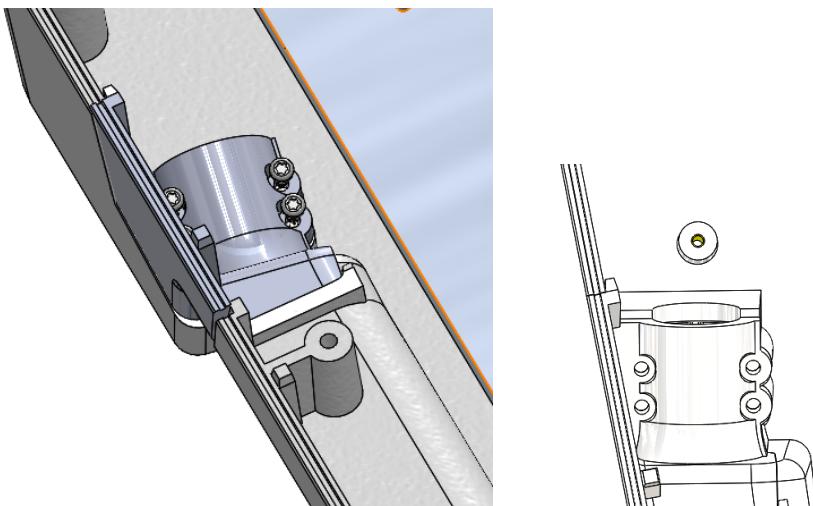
Cable Block mounted Tube Bushing and Back Case. Threaded hole location for terminating strength member.
